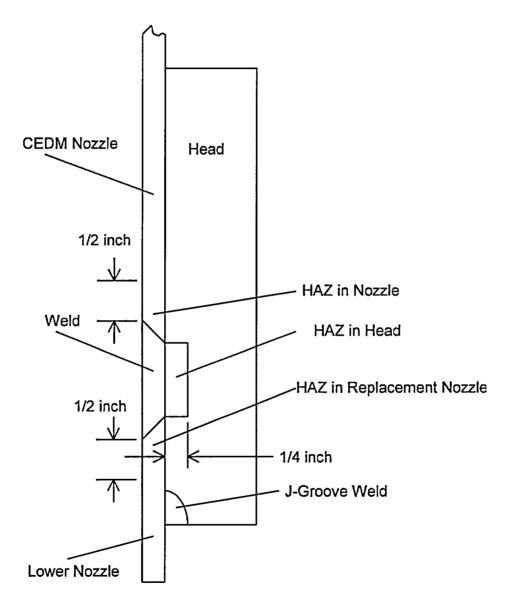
PSL1 and PSL2 CEDM Temper Bead Weld Repair Areas to be Examined
